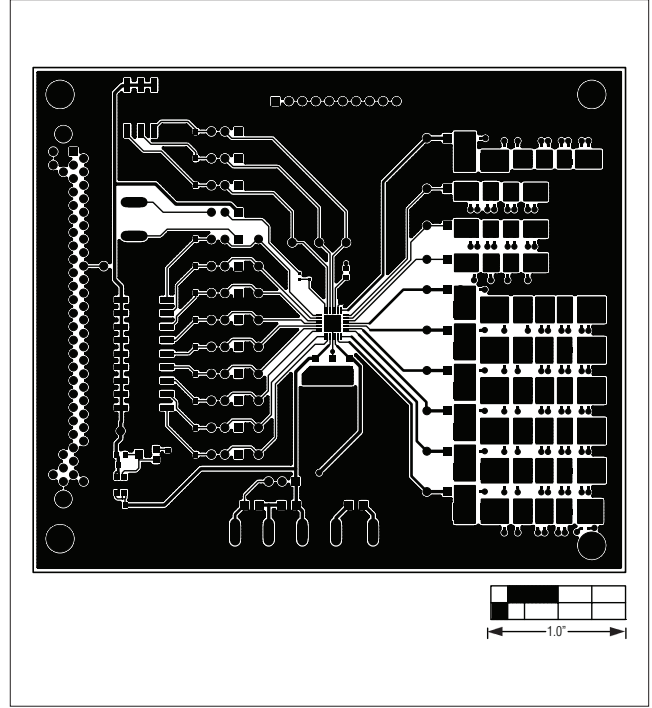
MAX17119 EV Kit PCB Layout—Component Side
